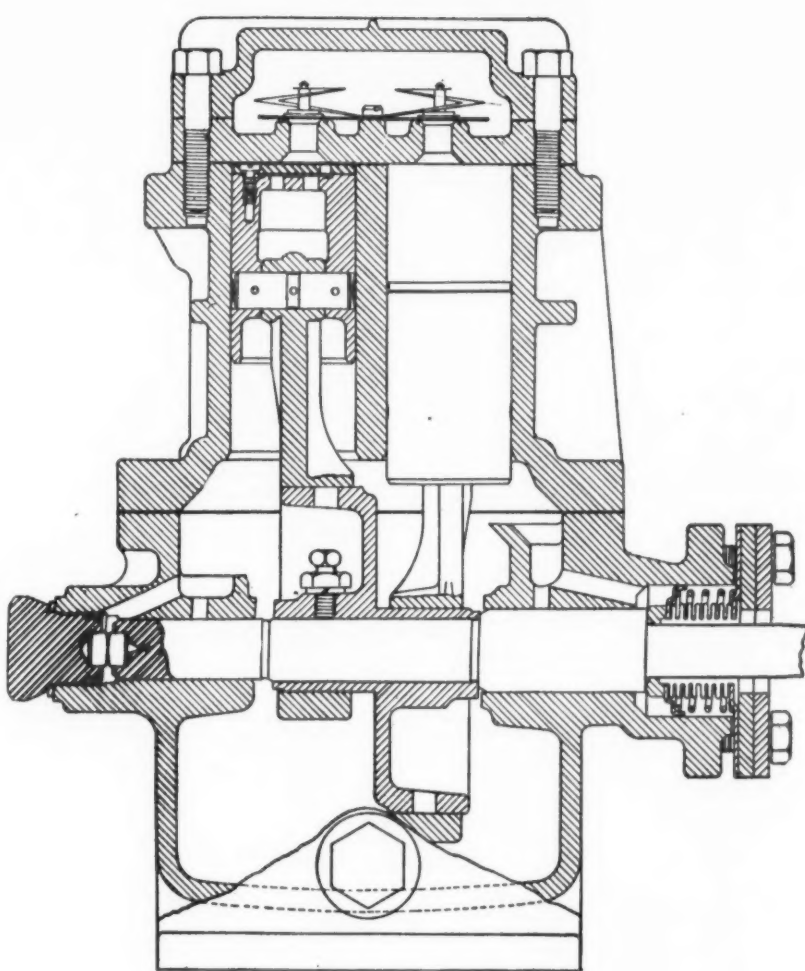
demonstrates Absopure's system of screwing the eccentric on the driving shaft.
